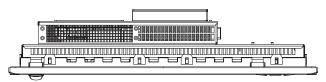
Dimension drawing of the key panel device with 15" display and expansion frame
